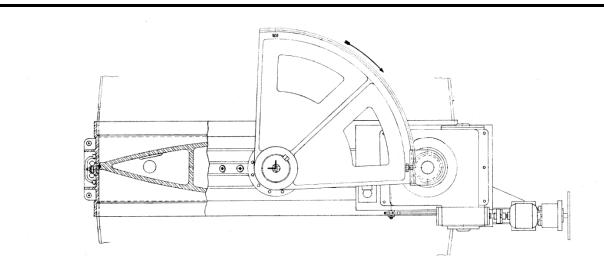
Plan view of vertical penstock butterfly valve with horizontal sector gear with electric motor driven operator
